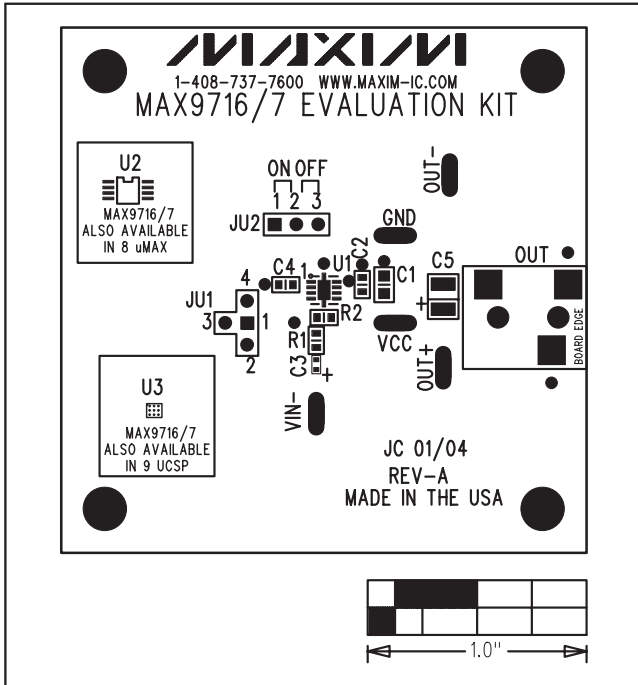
MAX9716 EV Kit Component Placement Guide—Component Side
